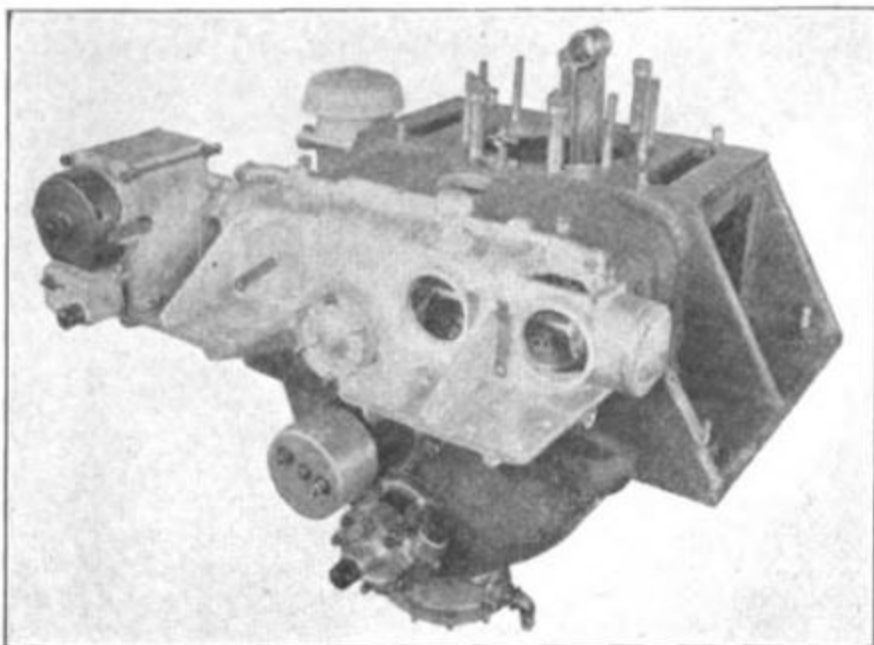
ASSEMBLY SHOWING MAGNETO HOUSING, OIL PUMP, WATER PUMP AND GENERATOR
